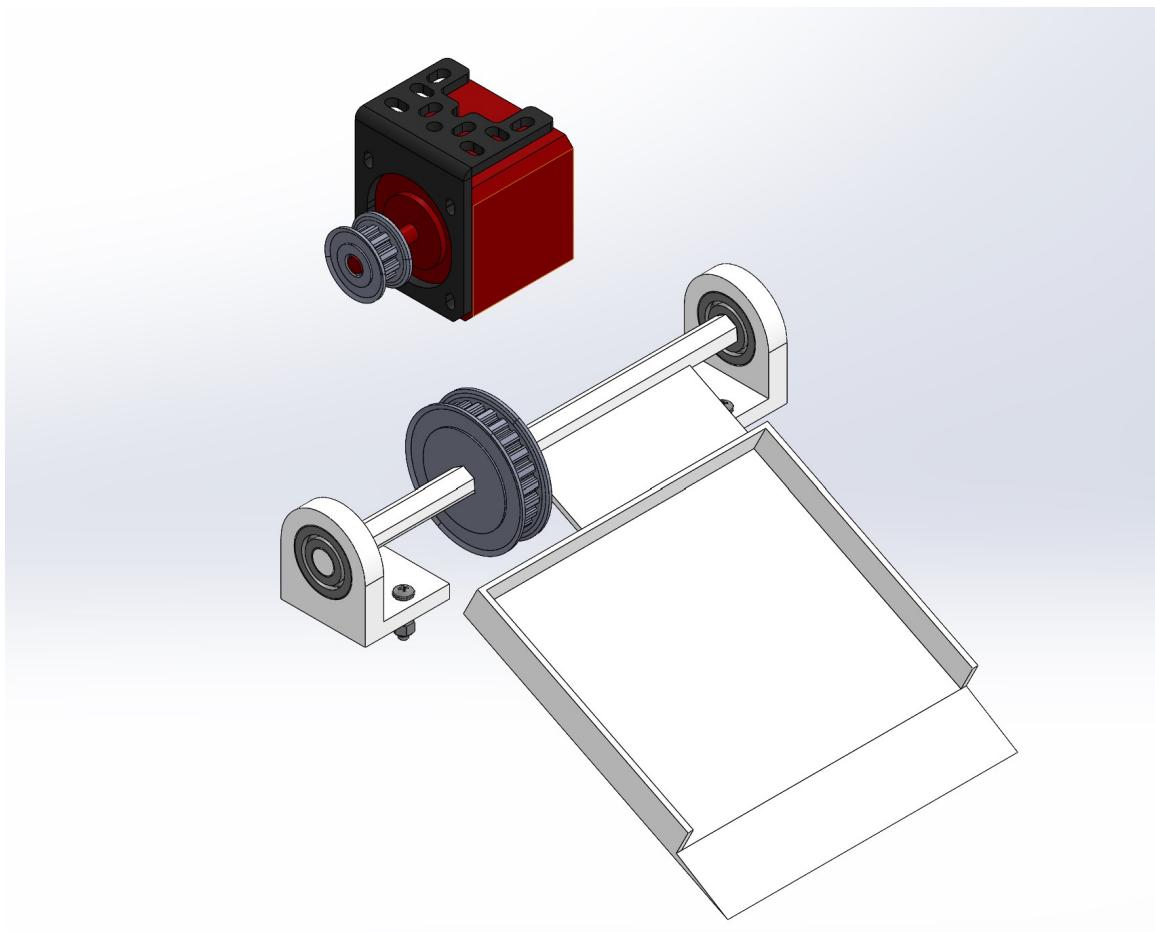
CAD Model of the Food Retrieval Sub-assembly
